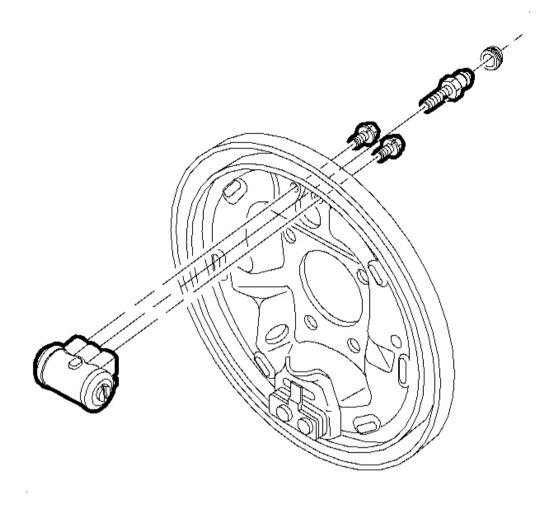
Removing/Installing Wheel Cylinder Courtesy of GENERAL MOTORS CORP.
